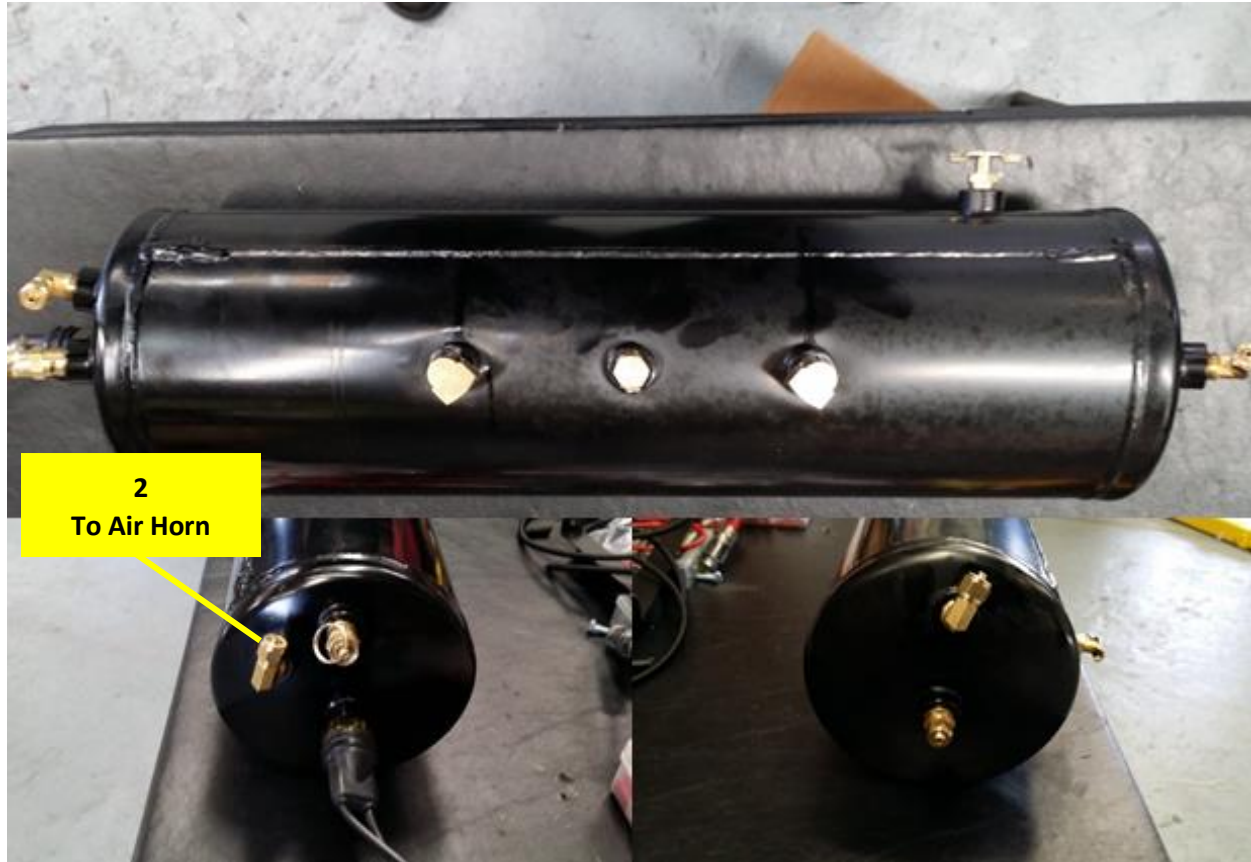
Air Tank with Fittings Installed (JL-JK-OBA Shown)
